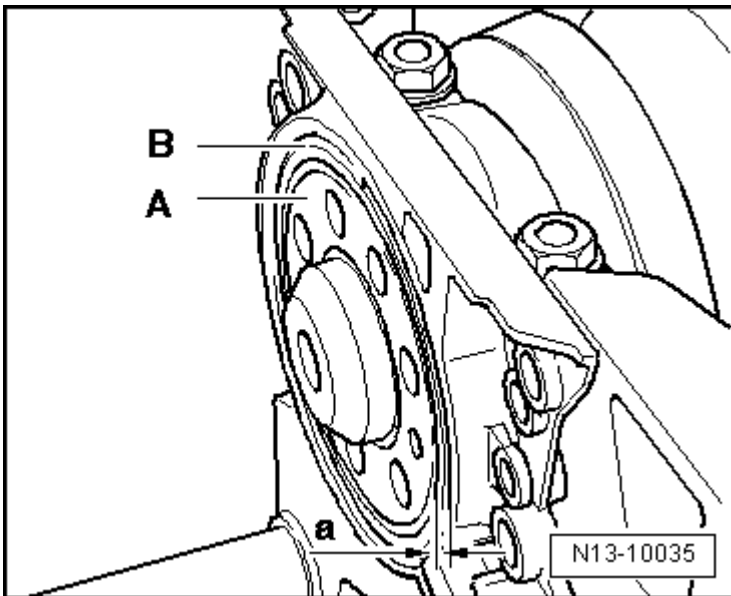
Identifying Installed Position Of Sensor Wheel On Crankshaft Is Exact
